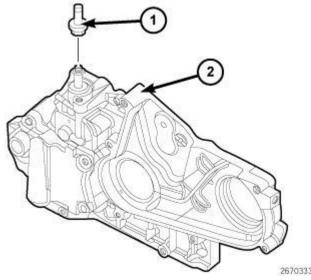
Vacuum Pump Check Valve & Front Engine Cover Courtesy of CHRYSLER LLC
